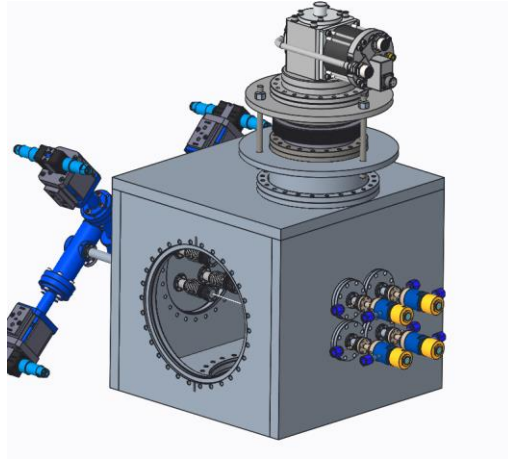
3D CAD model of the concept injector design showing the guard vacuum chamber with 10-inch conflat flanges and cryocooler connection on the top of the chamber. Barrel gate valves are shown to the left in the ends of the barrels.
